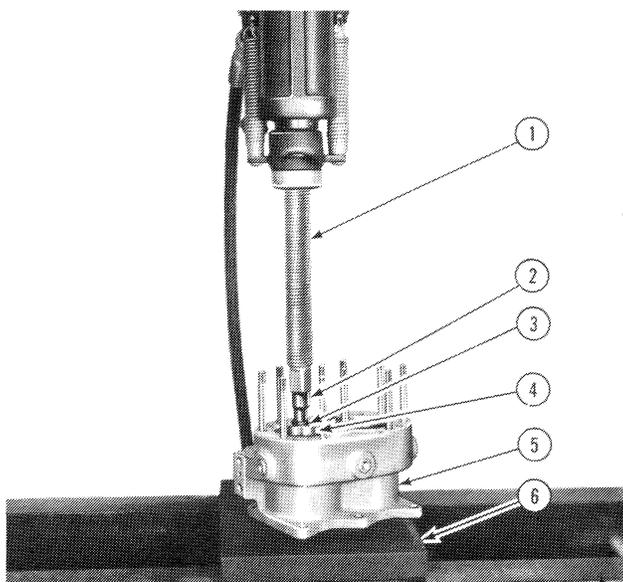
PRESSING INLET VALVE SEAT INTO CYLINDER T-28933
